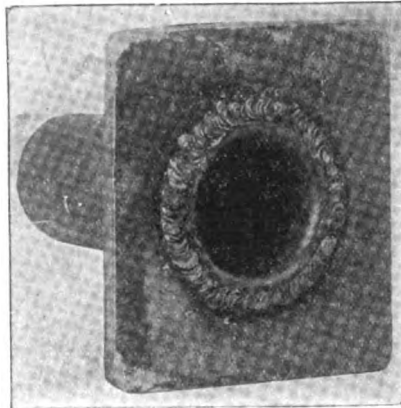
B. FLUE WELDING. 1. Put flue in as if it were not to be welded. 2. Send the engine out for a few trips to let the tubes take their set. 3. Sand blast the flue sheet. 4. Weld flues. A heavy bead of welded metal around the flue is not desirable. Put on the smallest bead that can be thoroughly welded to both flue and sheet.
